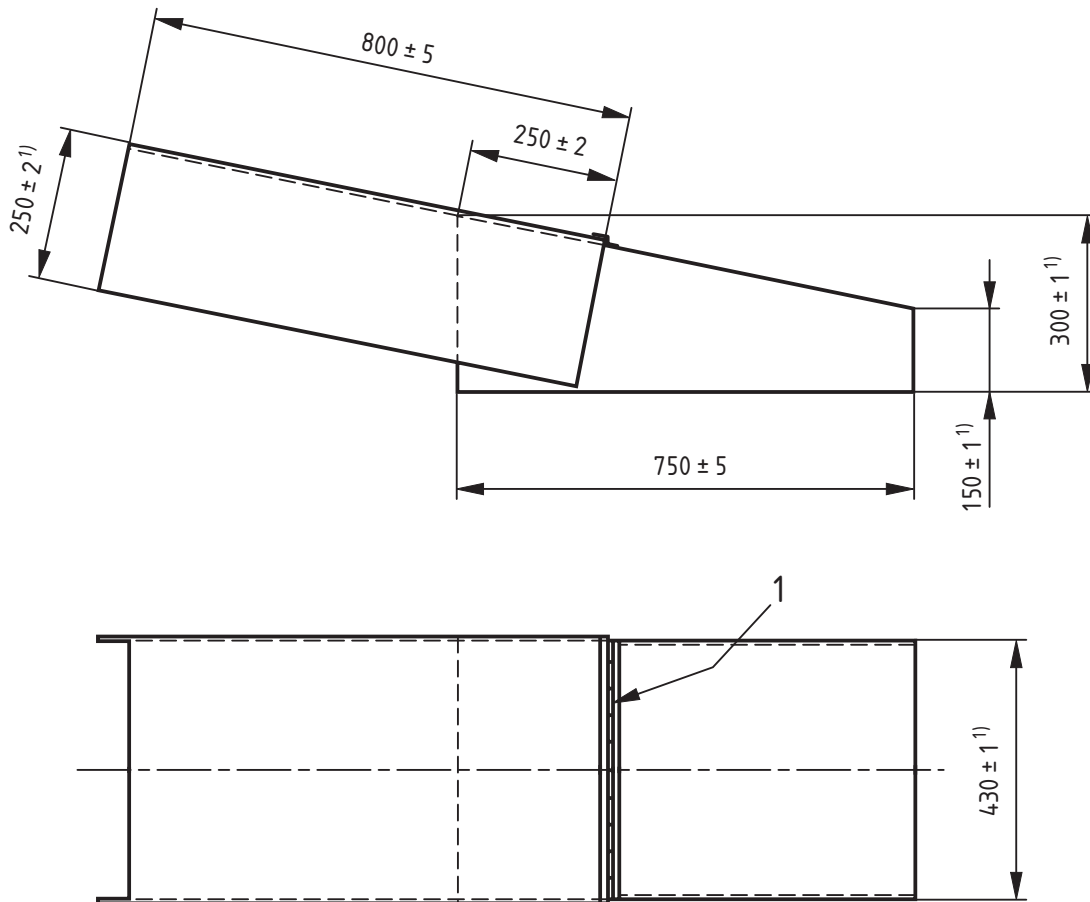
Detail drawing C – Corrugated perforated plate near test specimen
